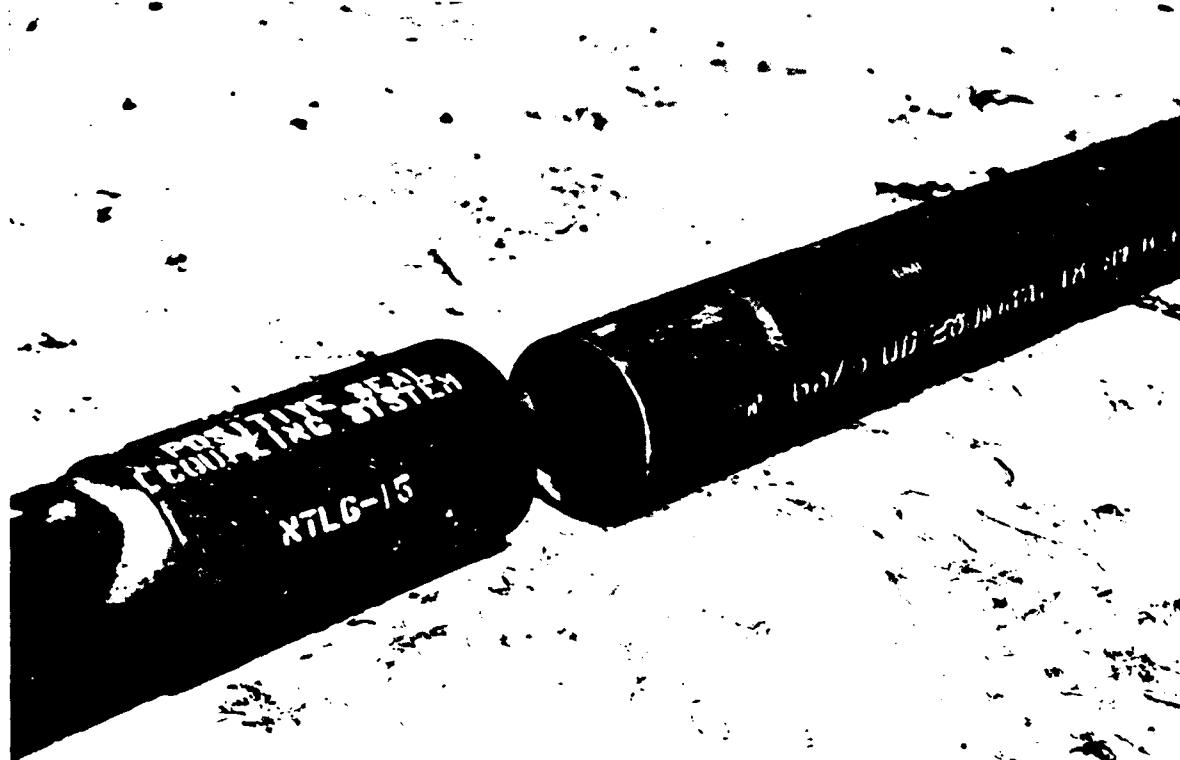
Hydrostatic pressure test #2. Pipe wall failure at groove at 1,800 psi.
